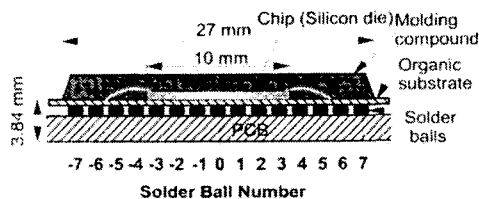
Schematic diagram of a sectioned WB-PBGA package assembly
